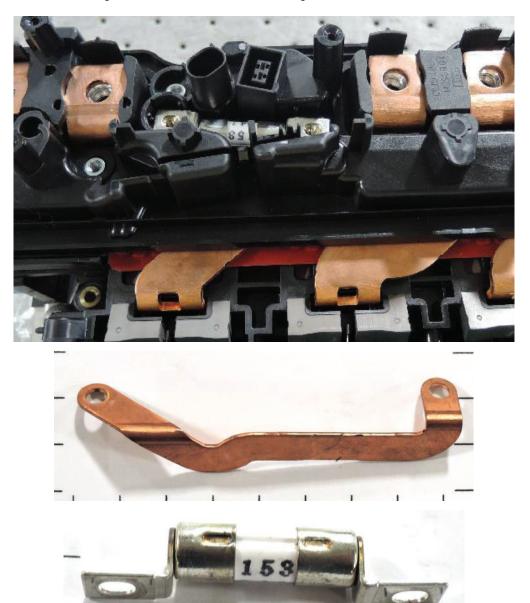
Audi Inverter: Bus Bar Installed Top, Unique Bus Bar Center, and 35 Amp 500VDC Fuse Bottom
